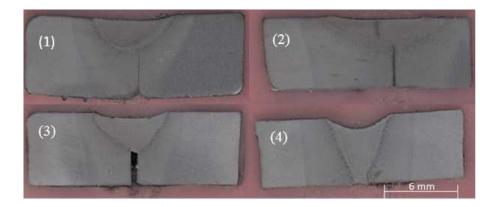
Weld bead profile of 6 mm thick AISI 1020 steel plate for maintain root gap of (1) 0 mm, (2) 0.5 mm, (3) 0.75 mm and (4) 1 mm.
